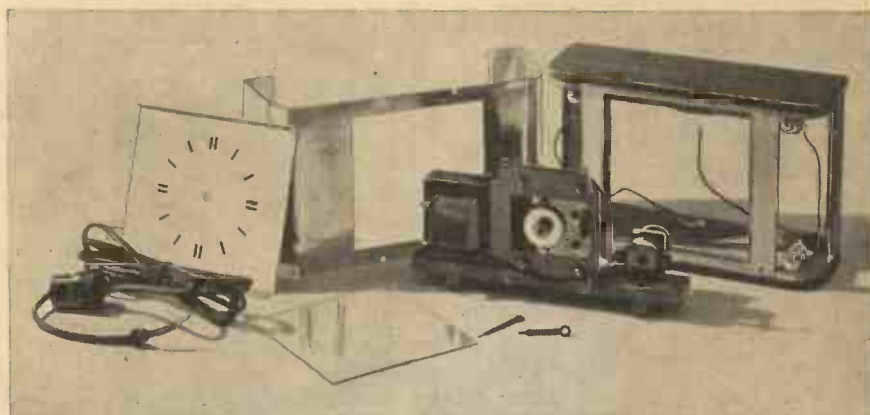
This illustration shows the various parts of the clock ready for assembly. Plywood and aluminium form the basis of this design.
